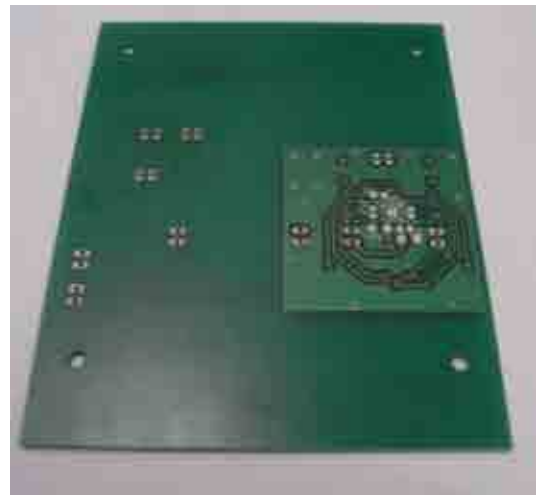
Both sides of PCB containing duplexer and receiver circuits.
